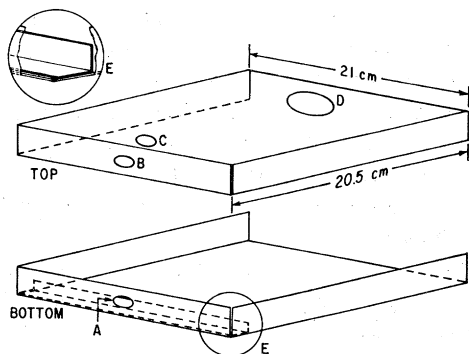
Exploded view of impregnating chamber. Not drawn to scale; see text for complete dimensions.
